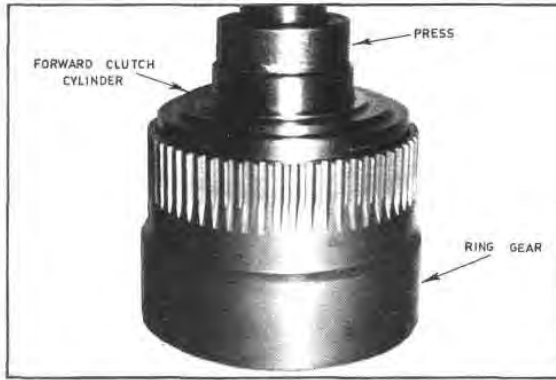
Pressing the Forward Clutch Cylinder into Position
